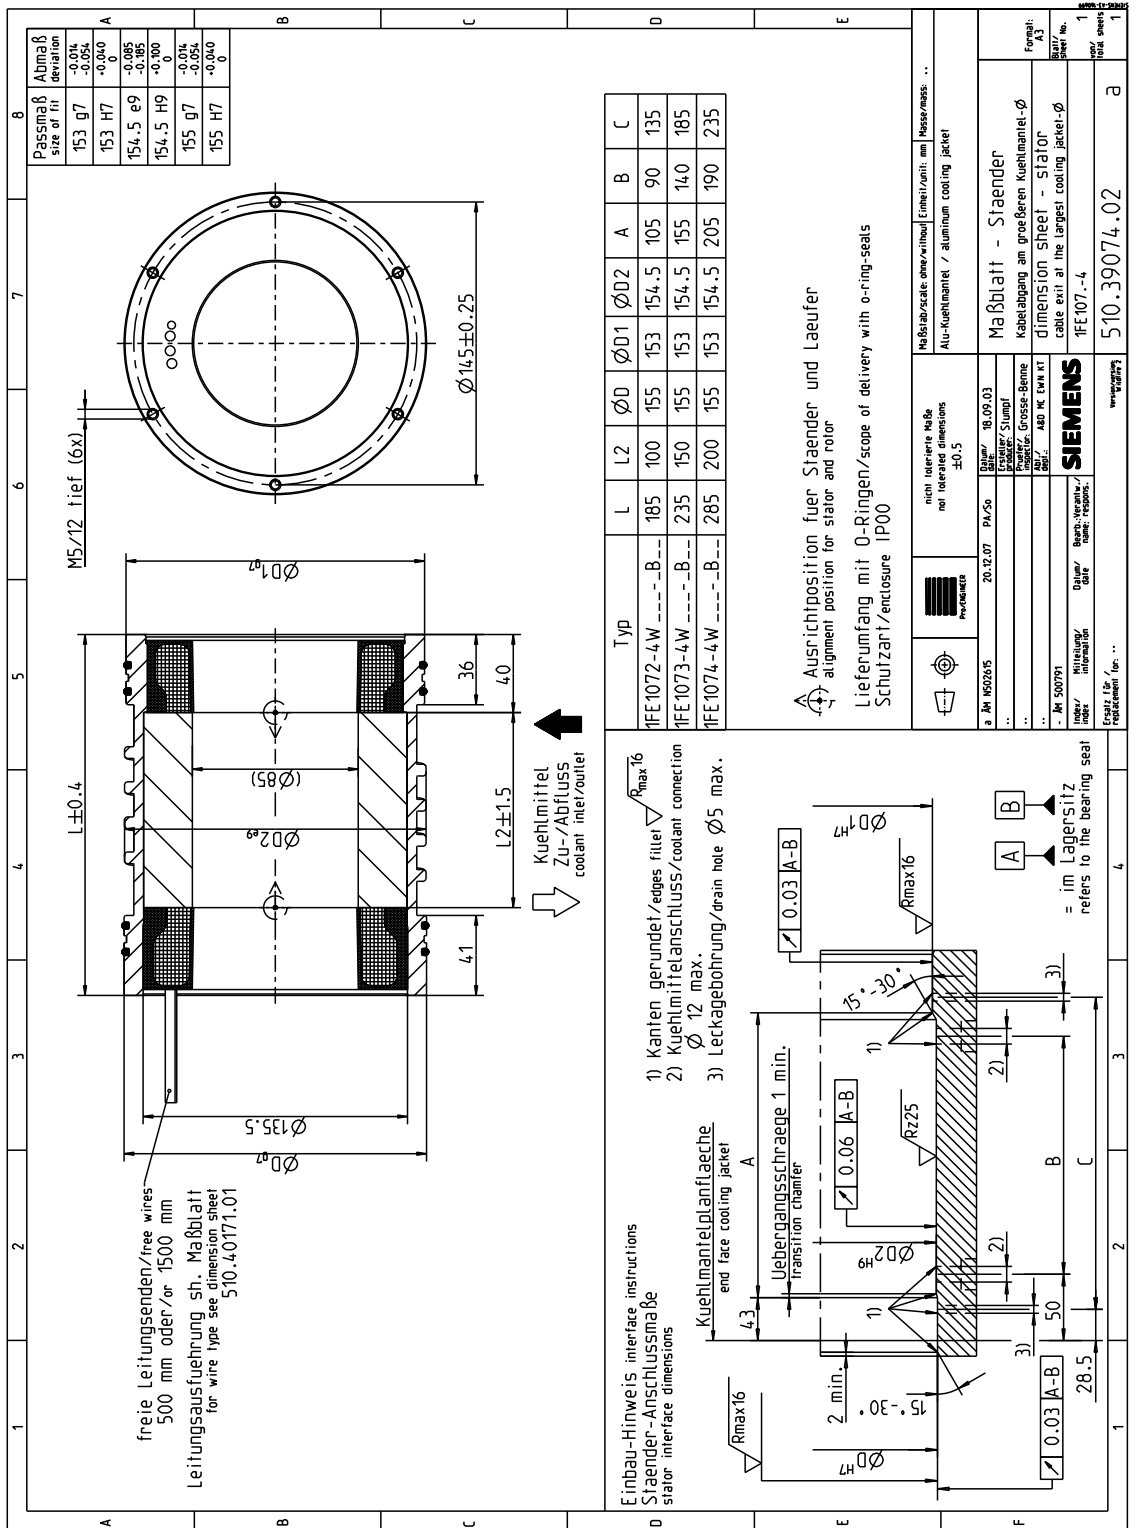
1FE107□-4, stator with cooling jacket, cable outlet at the larger cooling jacket diameter
